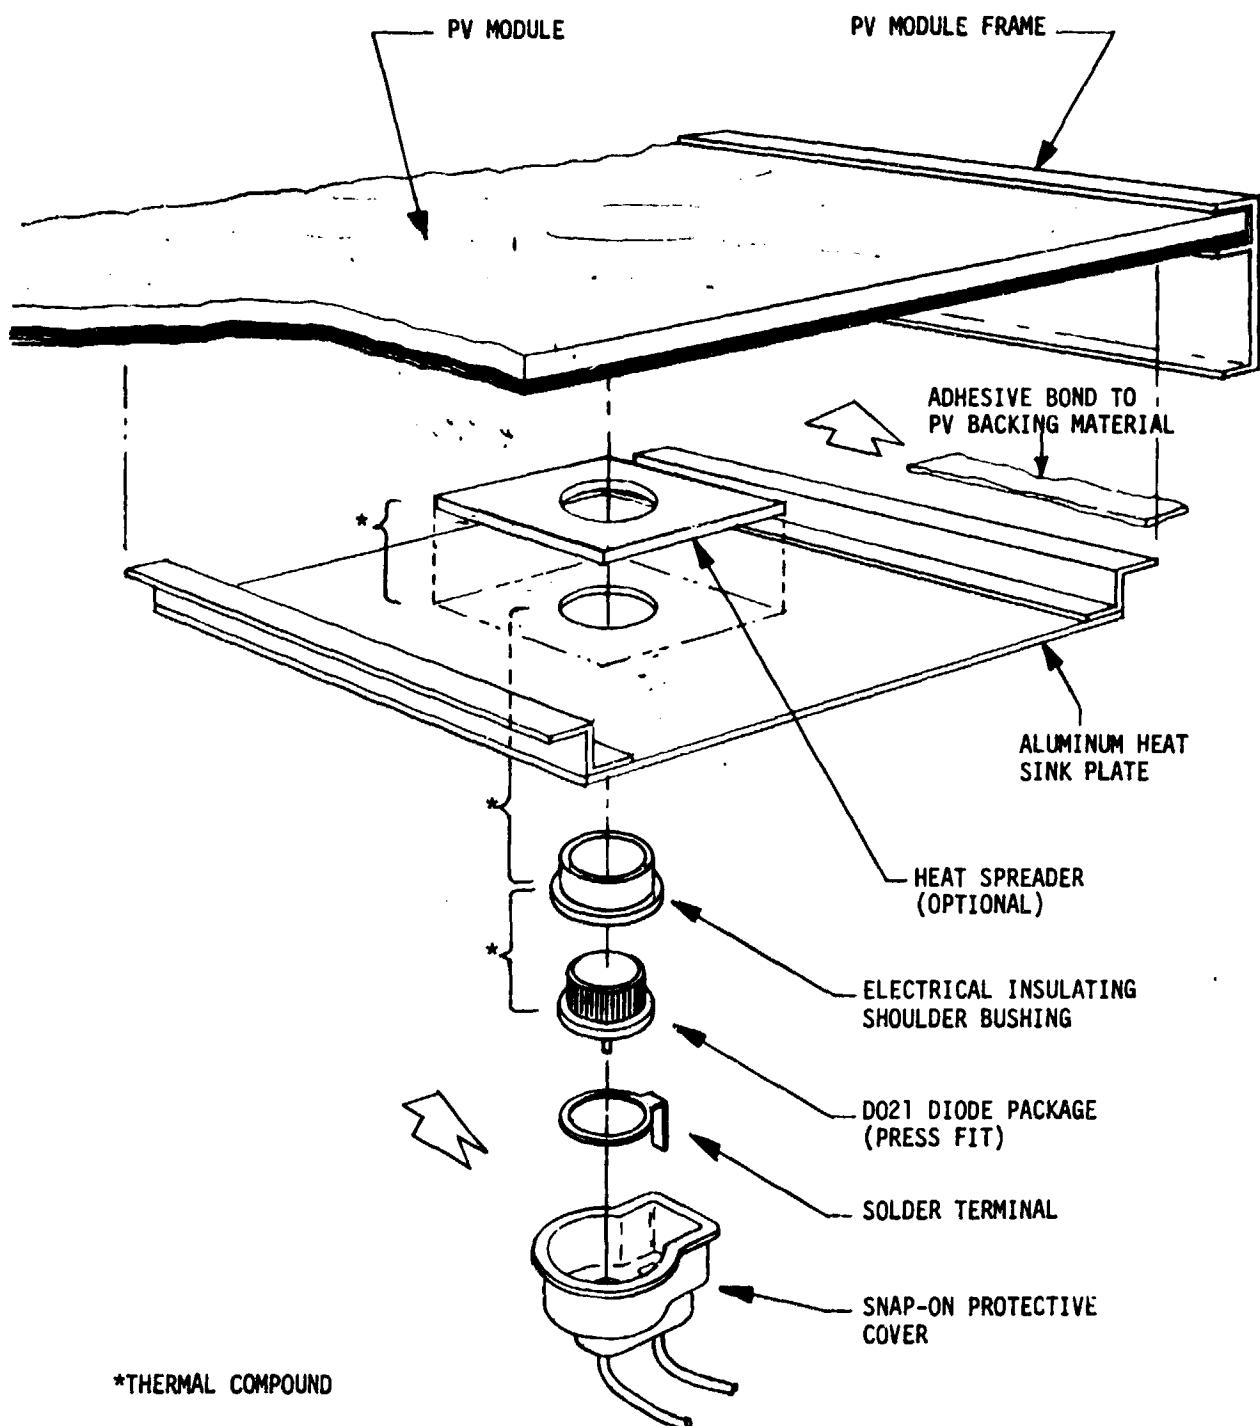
D021 Diode Package Mounted to Back of PV Module
